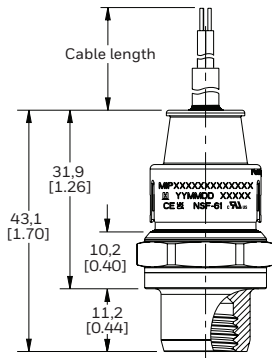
Cable Harness Mounting Dimensions (for reference only. mm [in])
